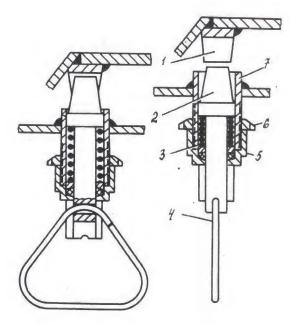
TURRET TRAVELING LOCK 1 - shoe; 2 - lock; 3 - spring; 4 - handle; 5 - nut; 6 lock nut; 7 - sleeve. To the left: turret locked in traveling position. To the right: turret unlocked
